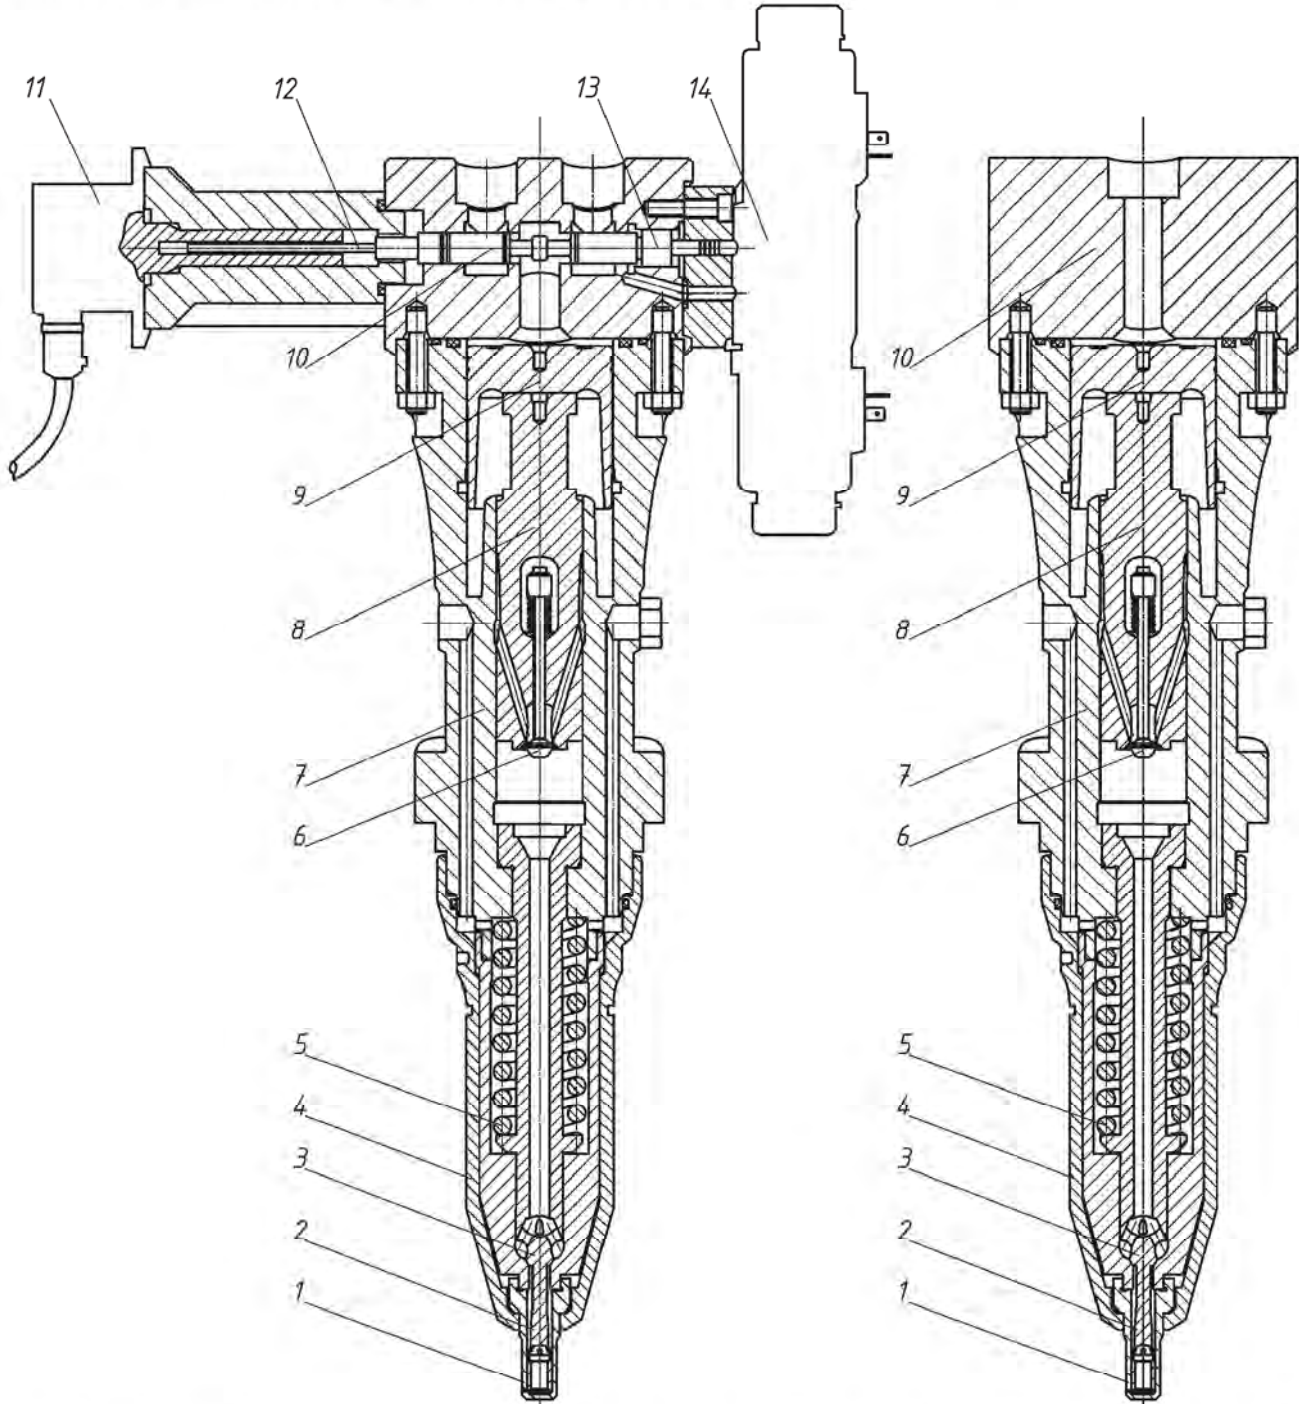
Hydraulic pump-injectors of low-speed engines from MAN series Mk 10 version *A* (*a*) and in version *B* (*b*): 1 – spray tip; 2 – spool valve; 3 – needle valve; 4 – cap; 5 – needle valve spring; 6 – suction valve; 7 – pump-injector housing; 8 – plunger; 9 – hydraulic piston; 10 – control spool; 11 – control spool position sensor; 12 – measuring rod; 13 – hydraulic piston of the control spool drive; 14 – solenoid control valve (adapted from [42, 43])
